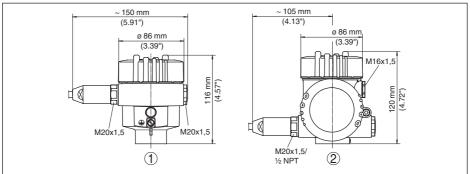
Housing versions with protection rating IP166/IP168 (112bar) - with integrated display and adjustment module the housing is 92mm/0.3512in higher
